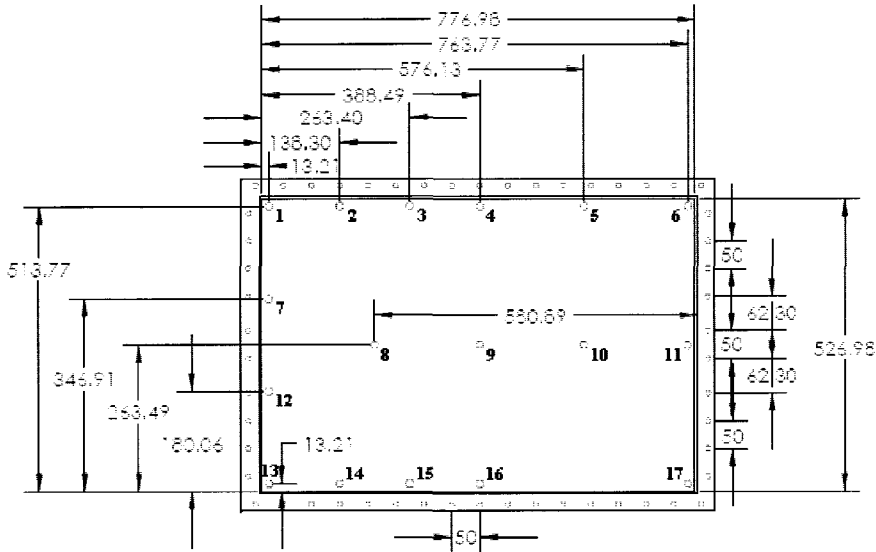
Bottom plate of the mould with 1/4" NPT holes (mm)
